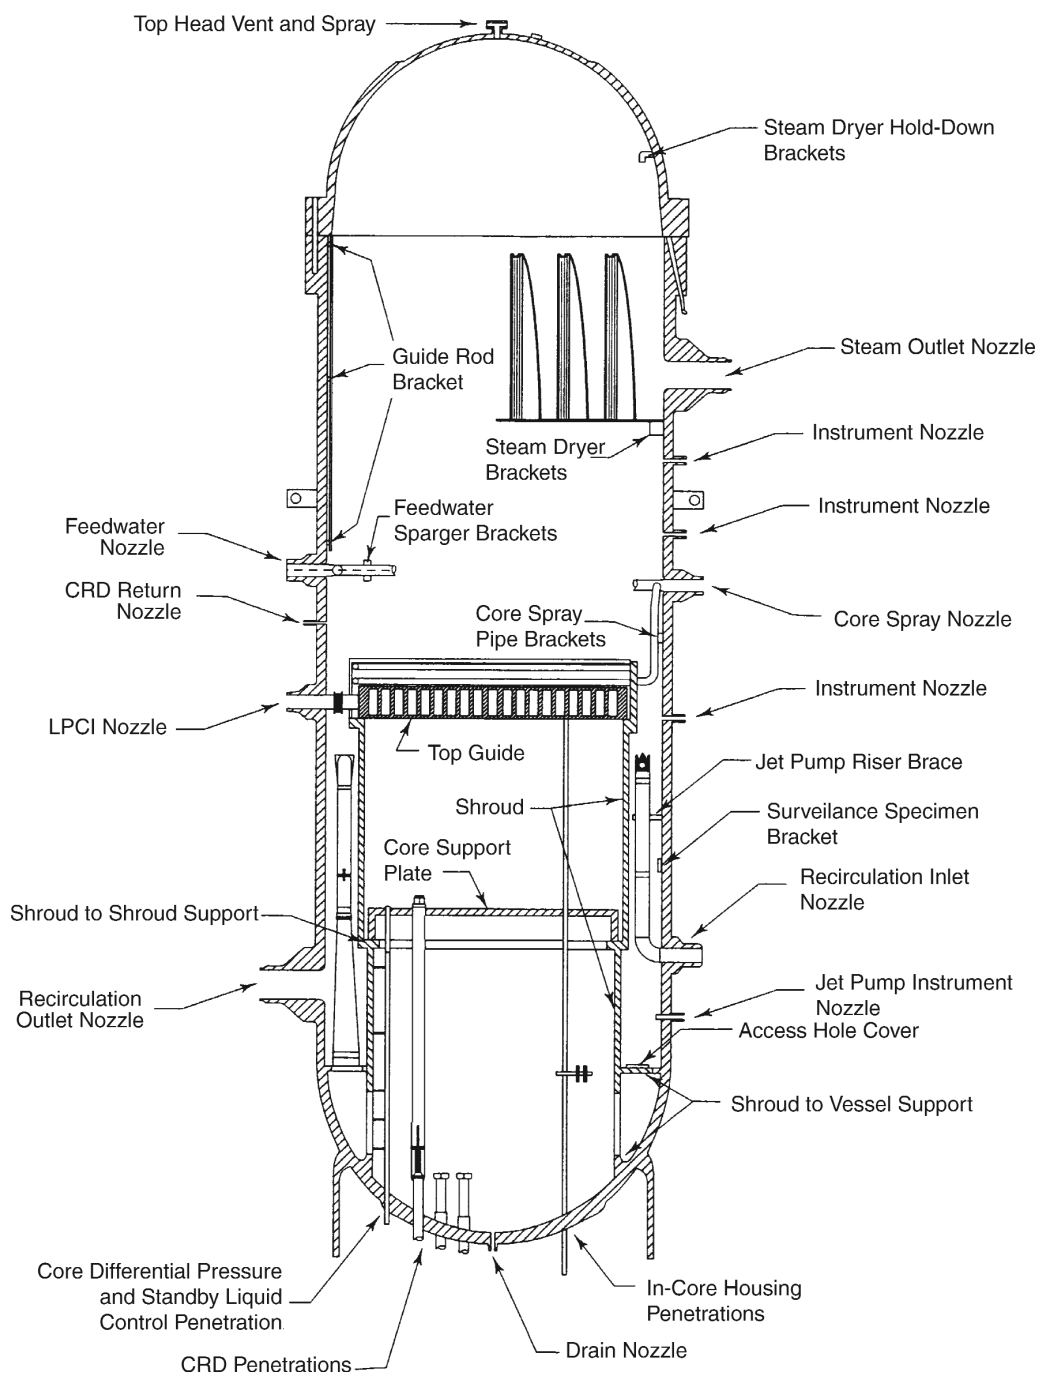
OVERVIEW OF BWR PRESSURE VESSEL AND INTERNAL COMPONENTS
